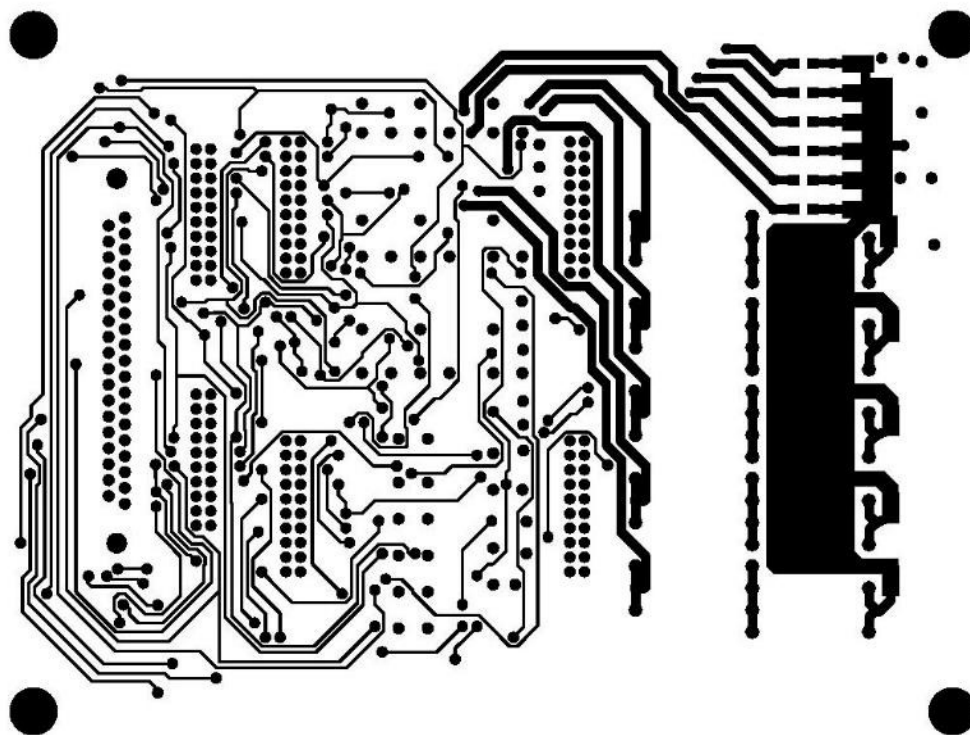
Miniature Semiconductor Breakout Box PCB Mask Top
